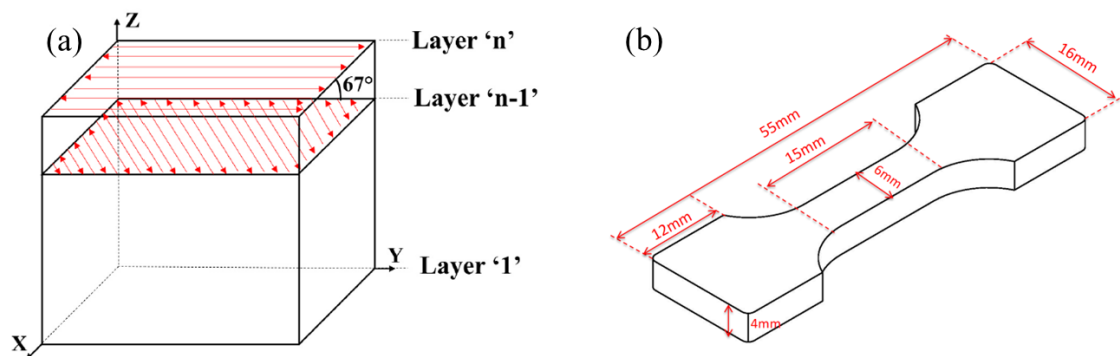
(a) Printing strategy and (b) sample size of the printed parts for tensile testing.
